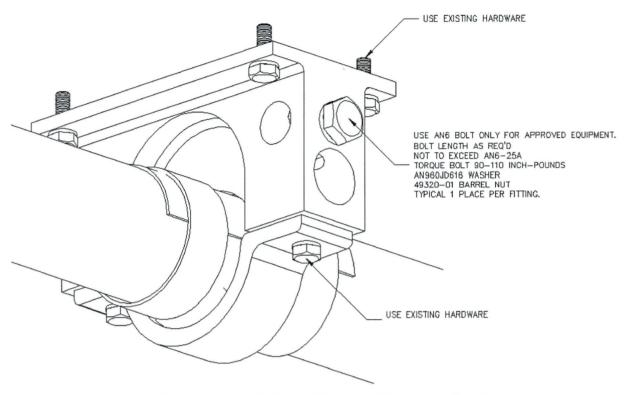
Installation of External Attachment Provisions (Forward shown, Aft similar)
